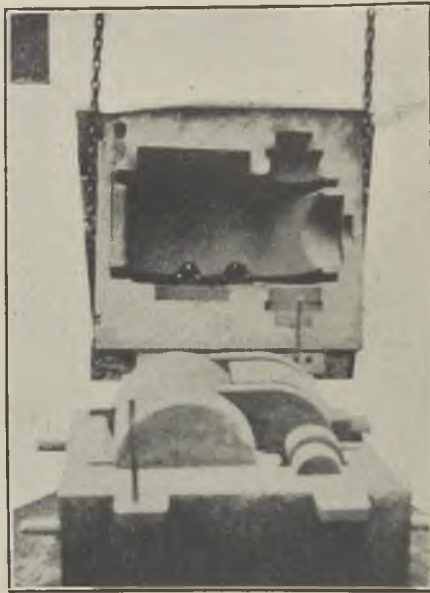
MOULD FROM OIL SAND READY FOR CLOSING.
